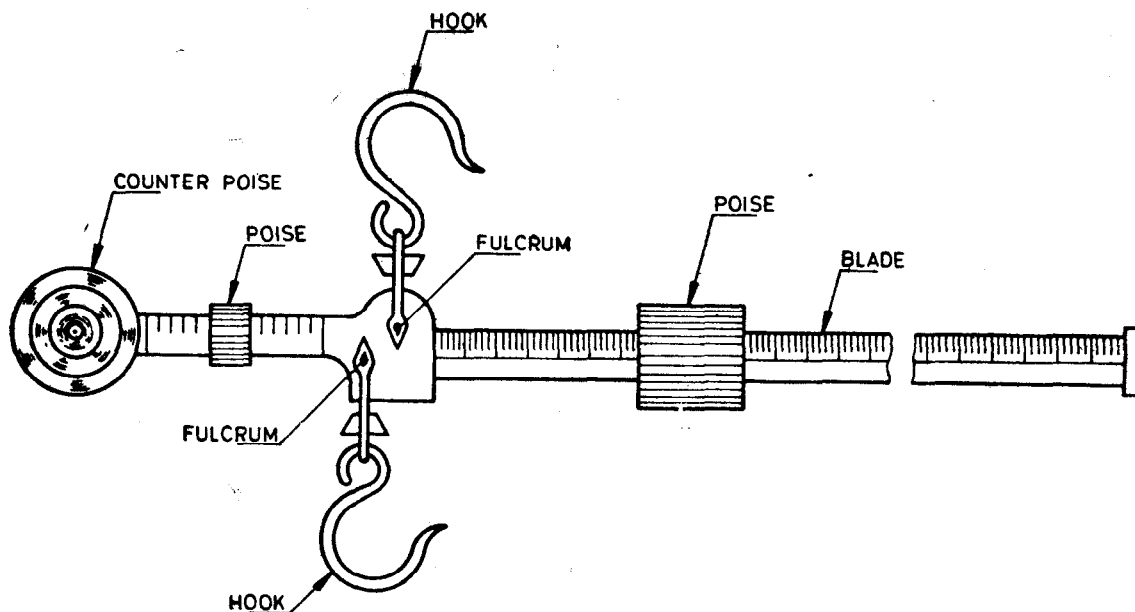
NOMENCLATURE AND GENERAL DESIGN OF STEELYARD
